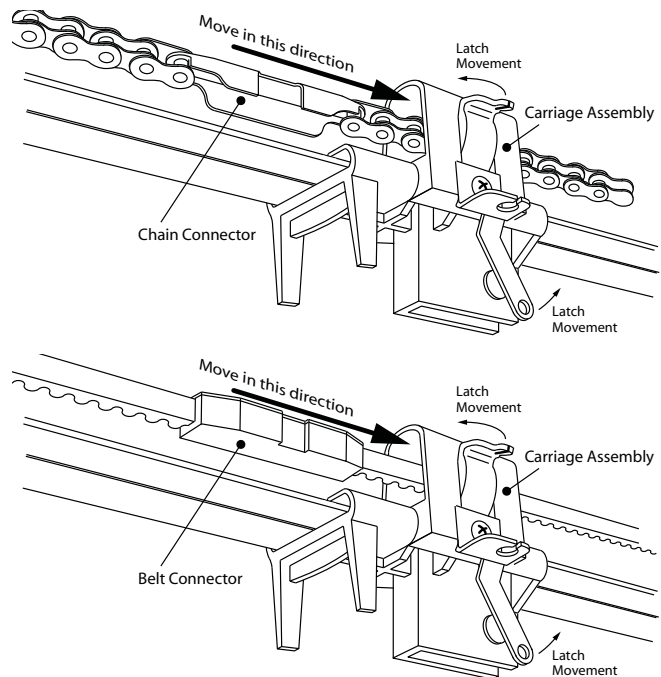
Engage Chain/Belt Connector to Carriage.
